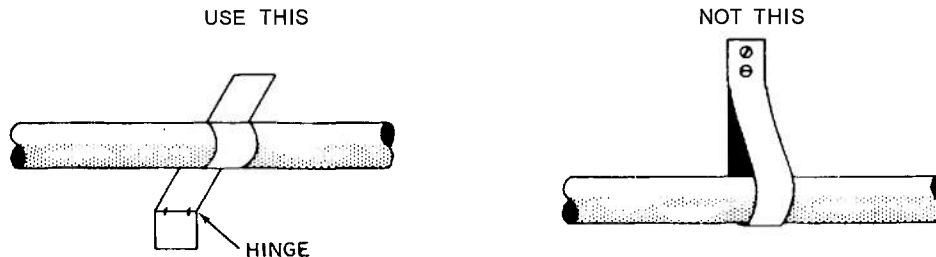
Use Hinged Clamps for Panel Mounting Tubes and Wires (Ref. 3)
